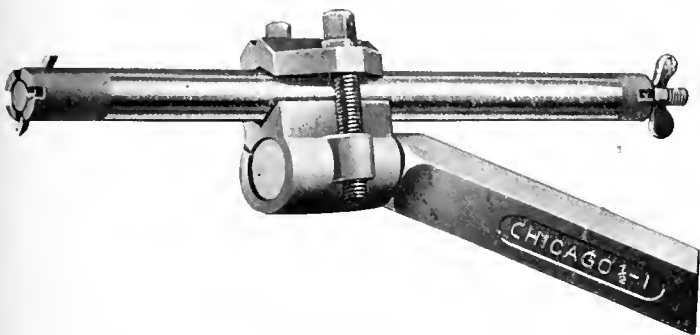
Chicago Boring Tool Holder with Boring-bar in Place.
